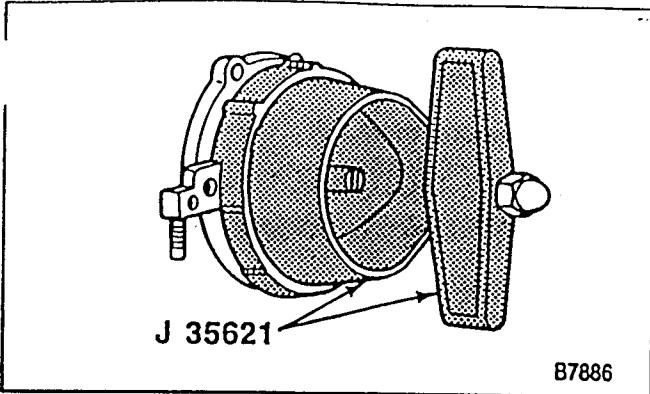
Installing the Crankshaft Rear Oil Seal (5.0L and 5.7L Engines)
